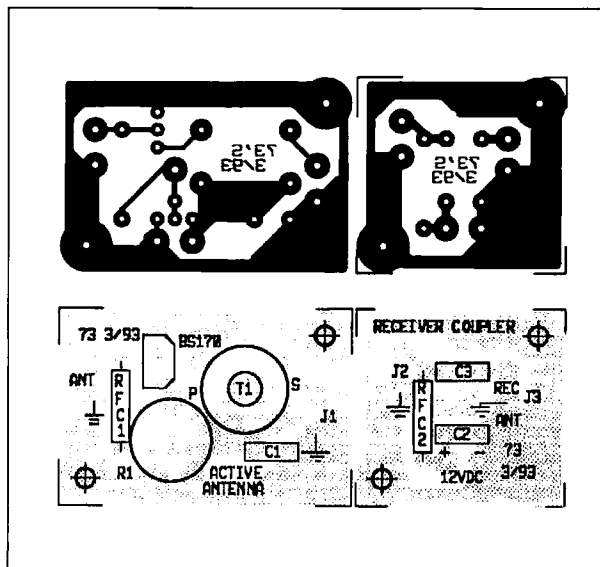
PC board pattern and parts placement for active antenna and receiver coupler.
